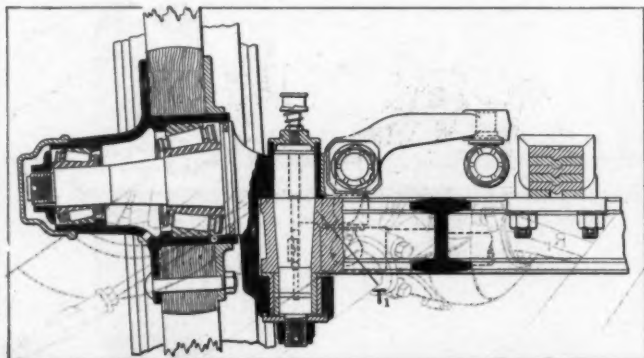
Section of the front axle at one end, also of a knuckle and a front wheel, showing the method of fastening the knuckle pin and the shape of the forging of the axle
